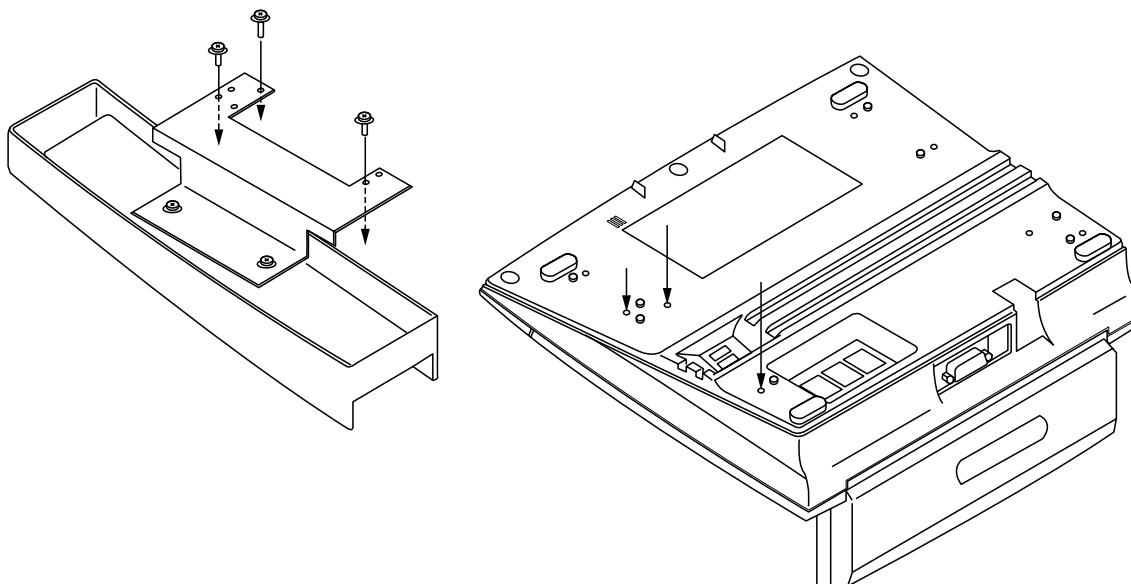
Mounting of Handset Support to SN716 DESKCON
